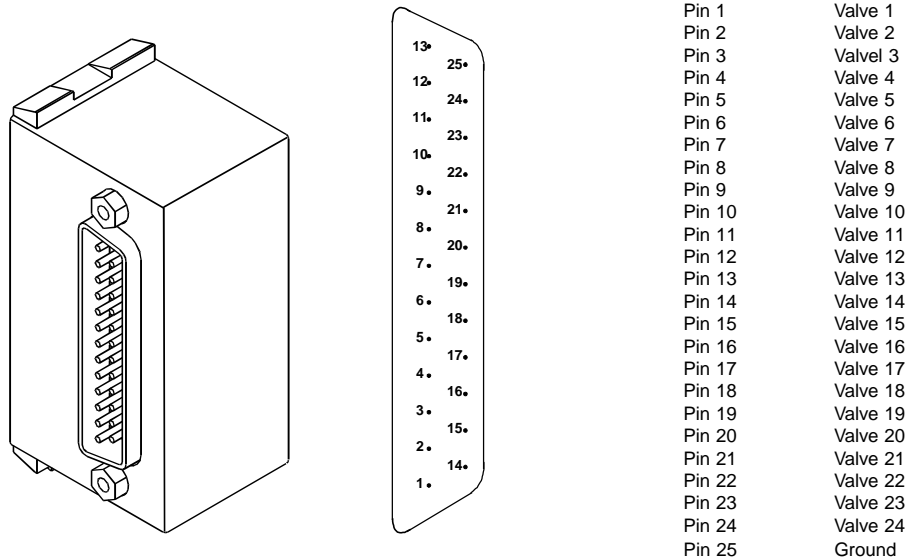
Multipole module for D-SUB IP 65 valve outputs and pin allocation of the plug
